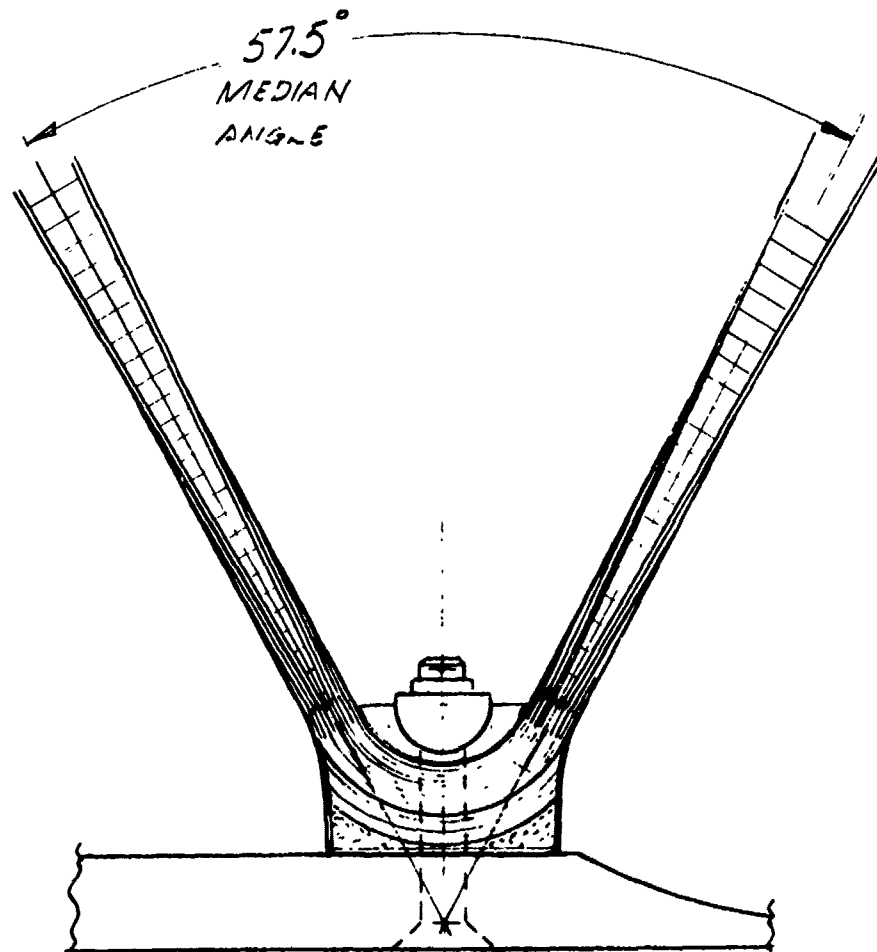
BOLTED JOINT - MAXIMUM BOLT SPACING APPROACH
